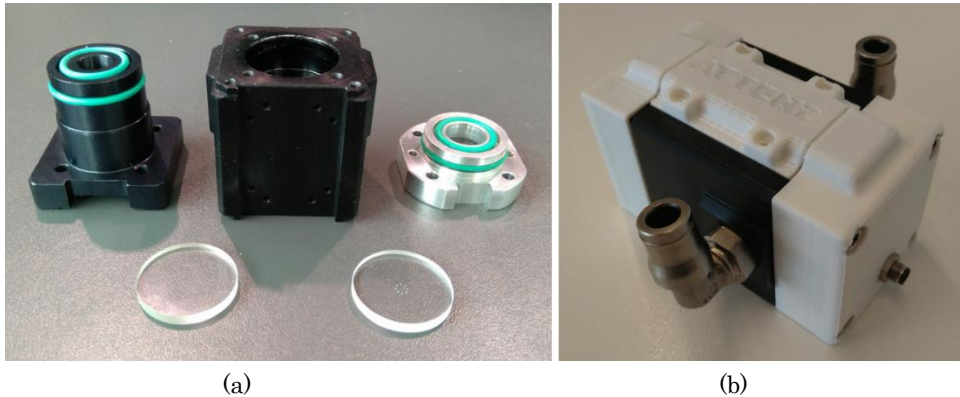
Example of wettable parts included within a sensor prototype for wear particle detection. (a) Shows optics, mechanics, and sealings and (b) shows the hydraulic fittings.
